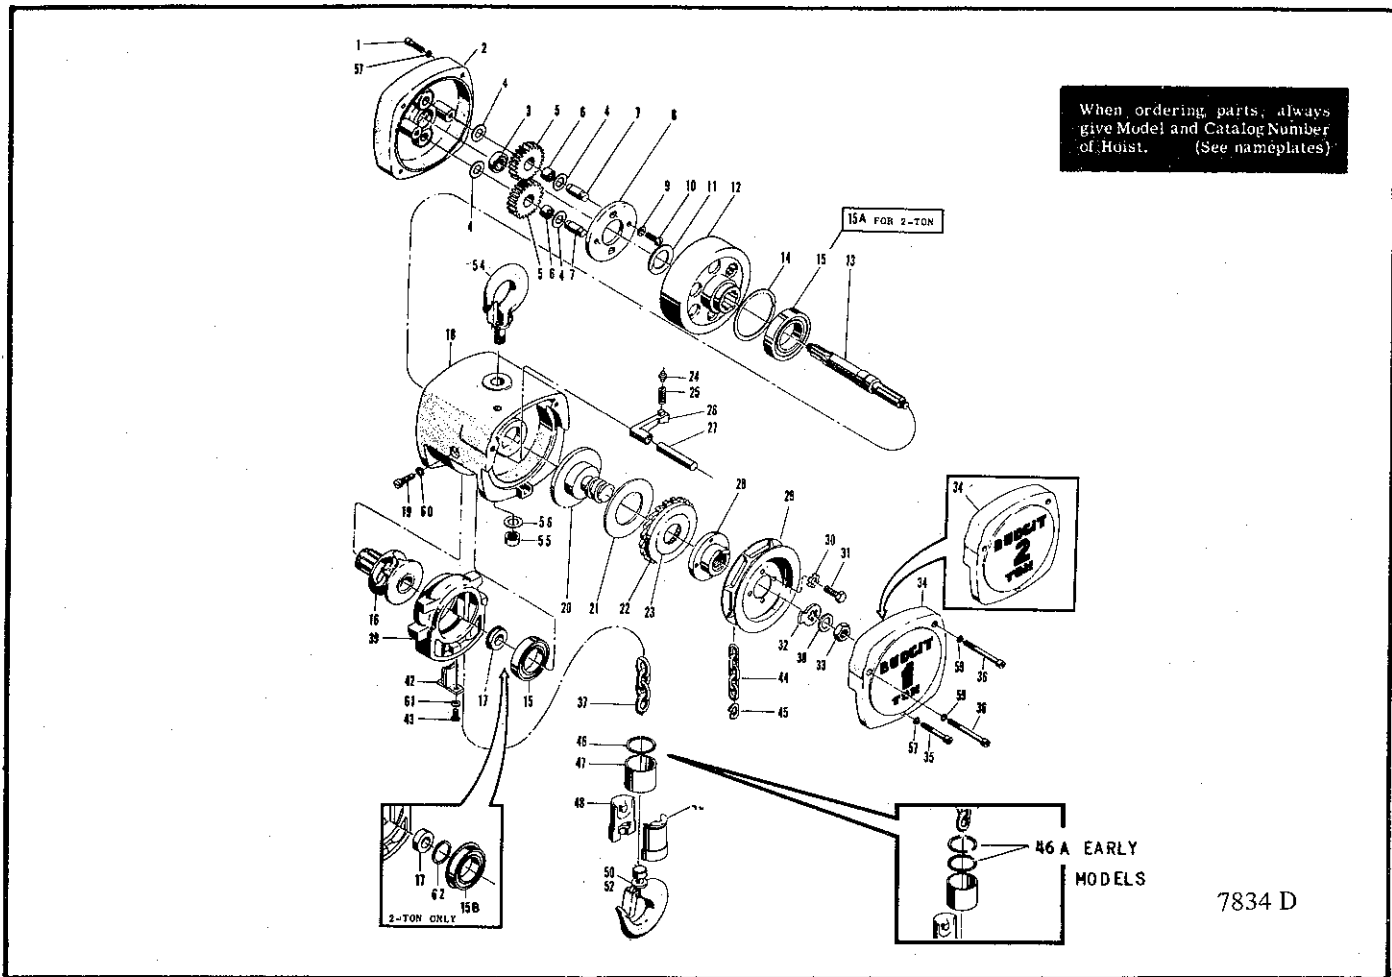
EXPLODED VIEW OF 1 & 2 TON CAPACITY CHAIN HOISTS
